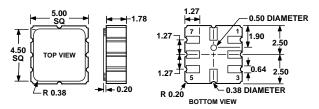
8-Terminal Ceramic Leadless Chip Carrier [LCC] (E-8) Dimensions shown in millimeters
